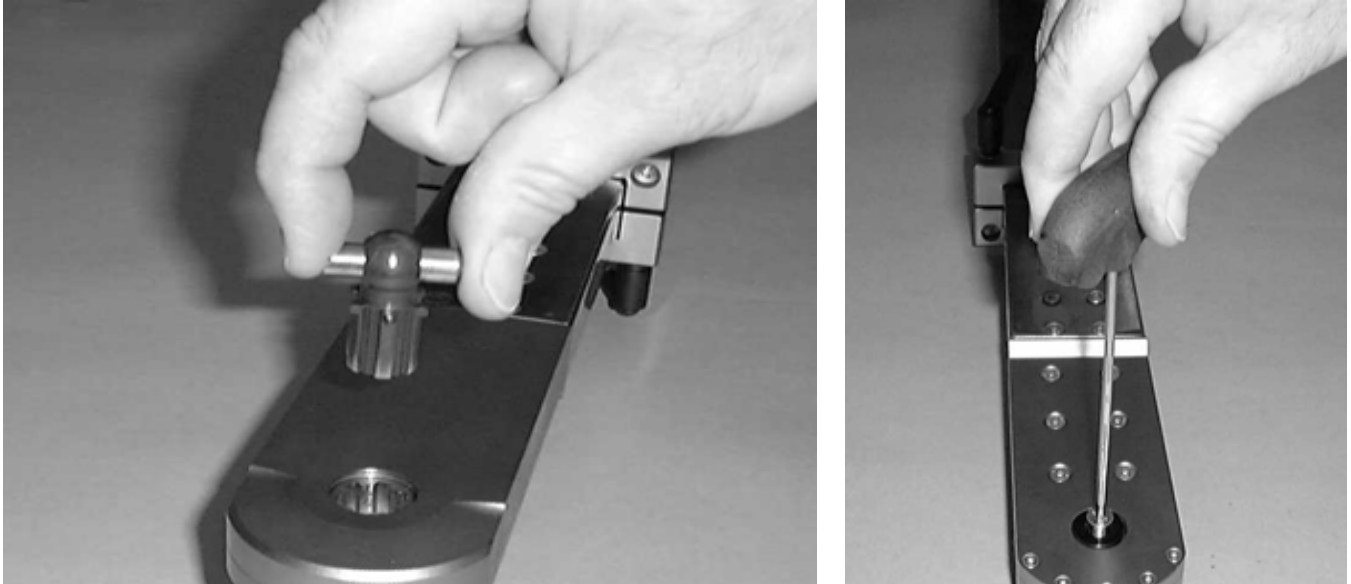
MOUNTING OF DRIVE SHAFT WITH BALL JOINT TYPE 15 G
